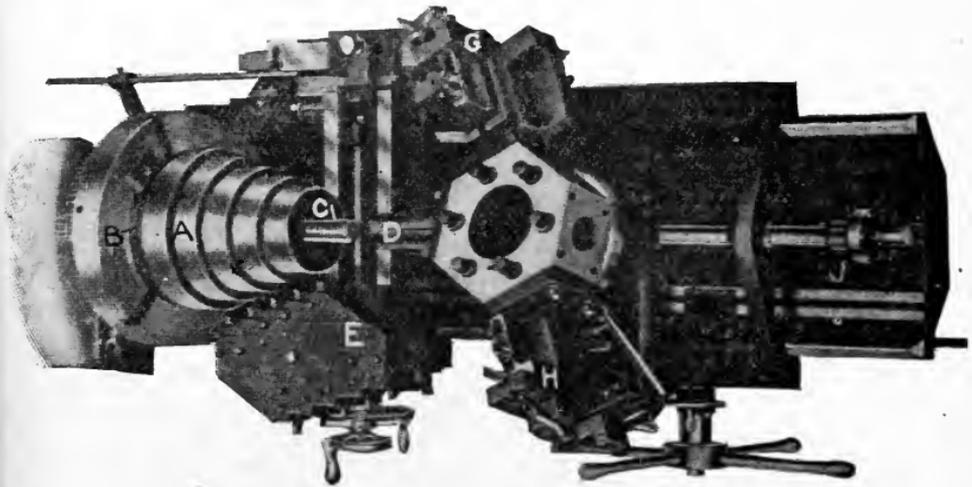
Turret Lathe Arranged to Machine Outside of Cone Pulley
